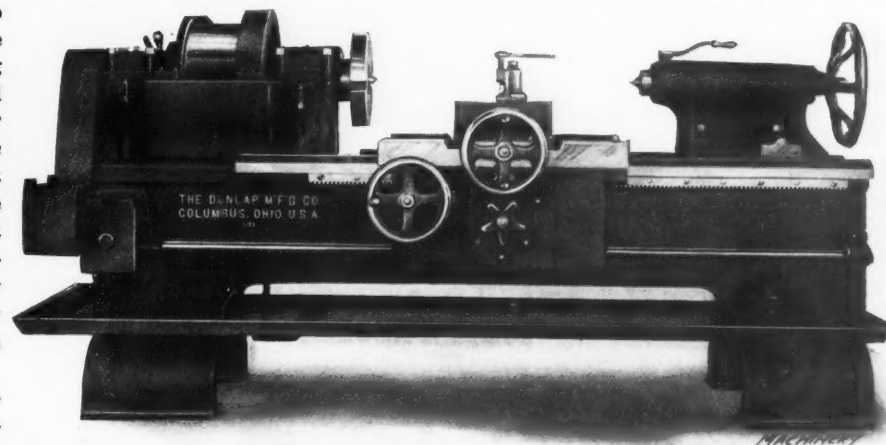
Dunlap 21-inch Shell Turning and Boring Lathe
